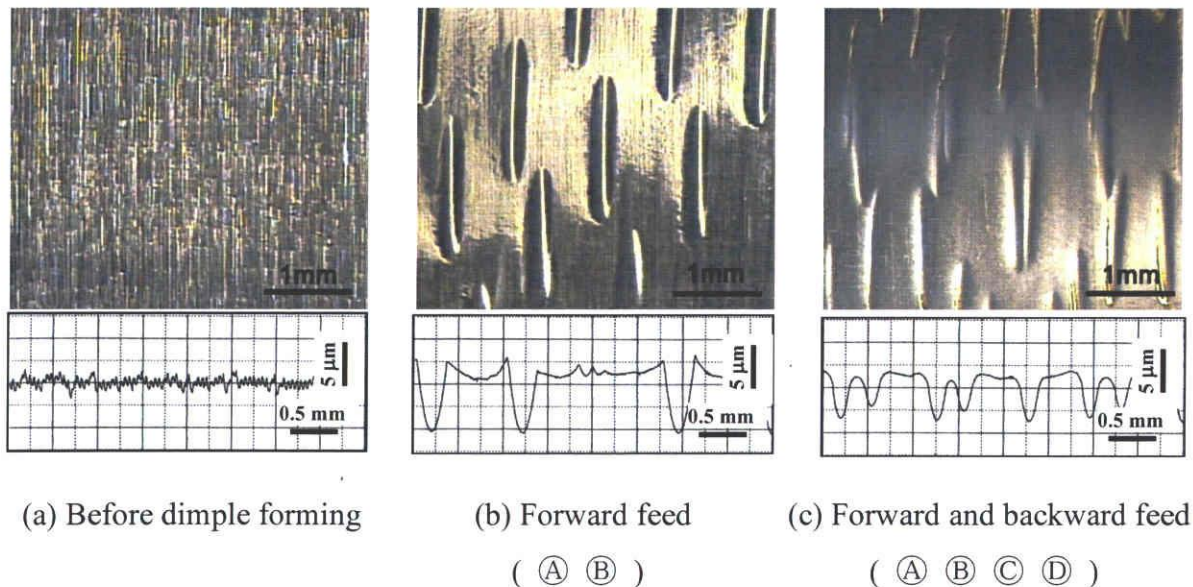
Surface profiles and appearances of surface after dimple forming
